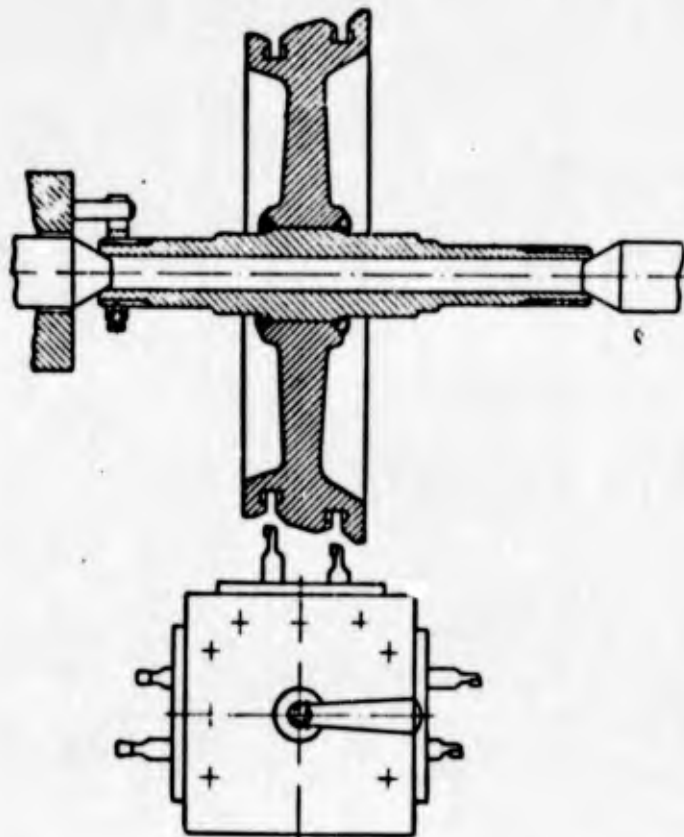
Machining of T-shaped annular grooves in wheels of turbopump units.
